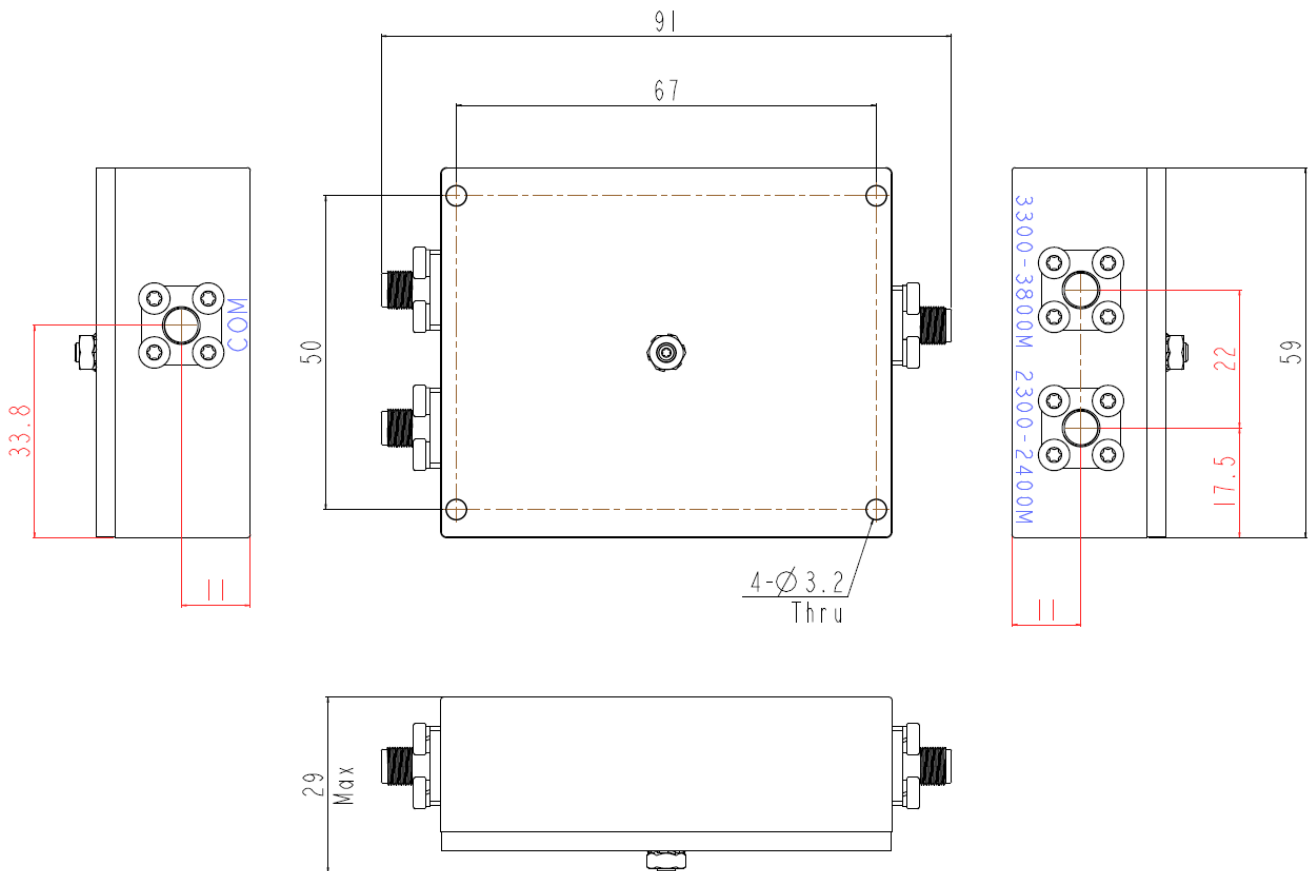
JX-CC2-2300M3800M-60S front panel layout
